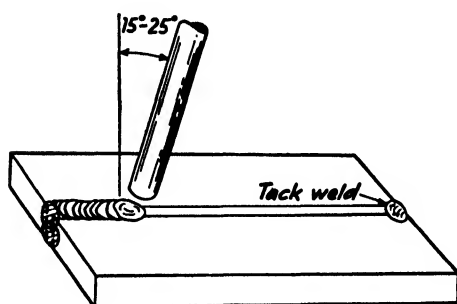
Where it is possible to weld from both sides, butt welds in metal up to $\frac{1}{4}$ in. in thickness may be made without beveling the edges.
